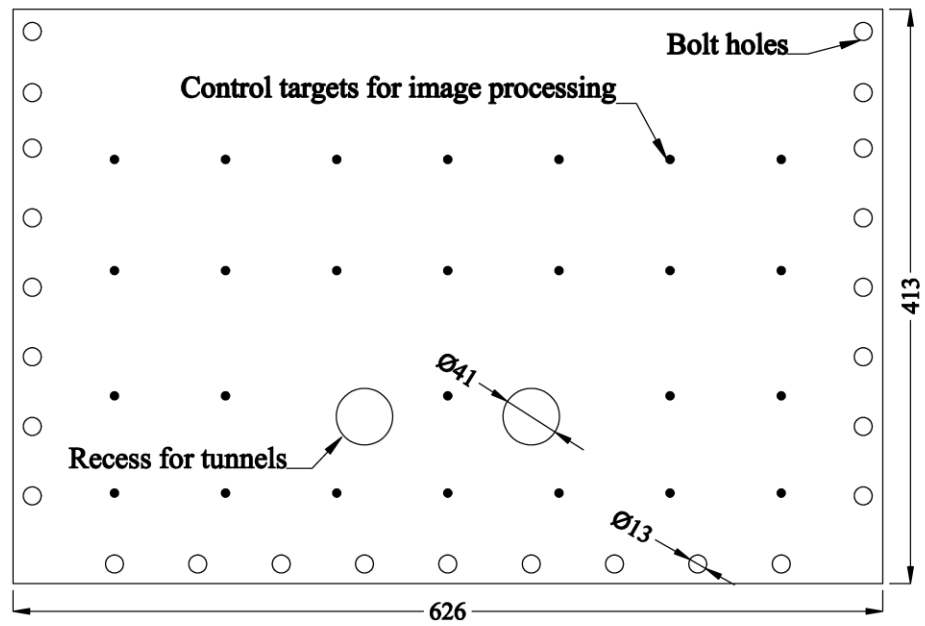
Schematic plan of the Twin-Tunnel Support Window
